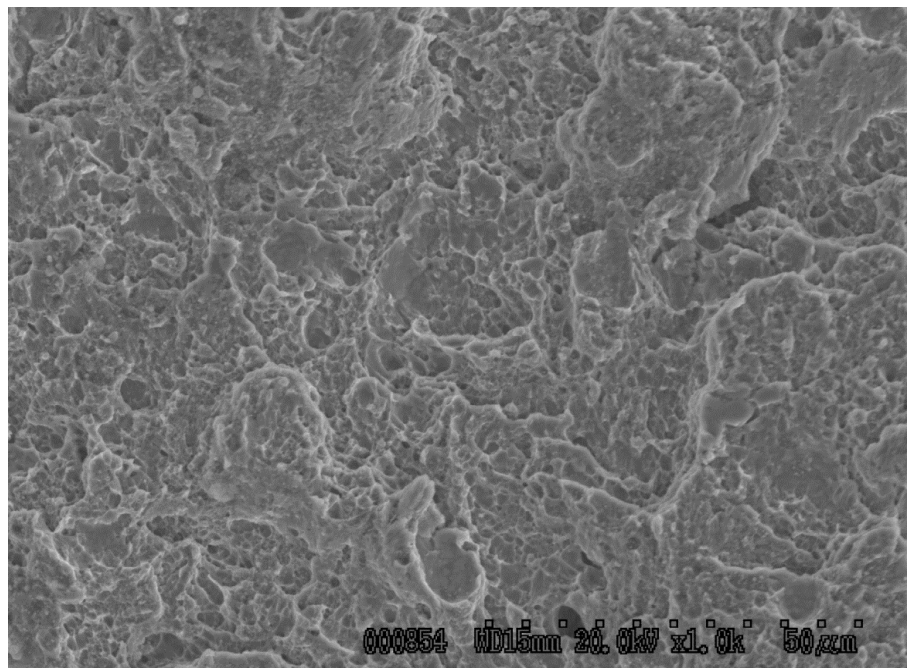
Scanning electron microscope fractograph of blade airfoil fracture surface at Area "854" shown in Fig. 286.
